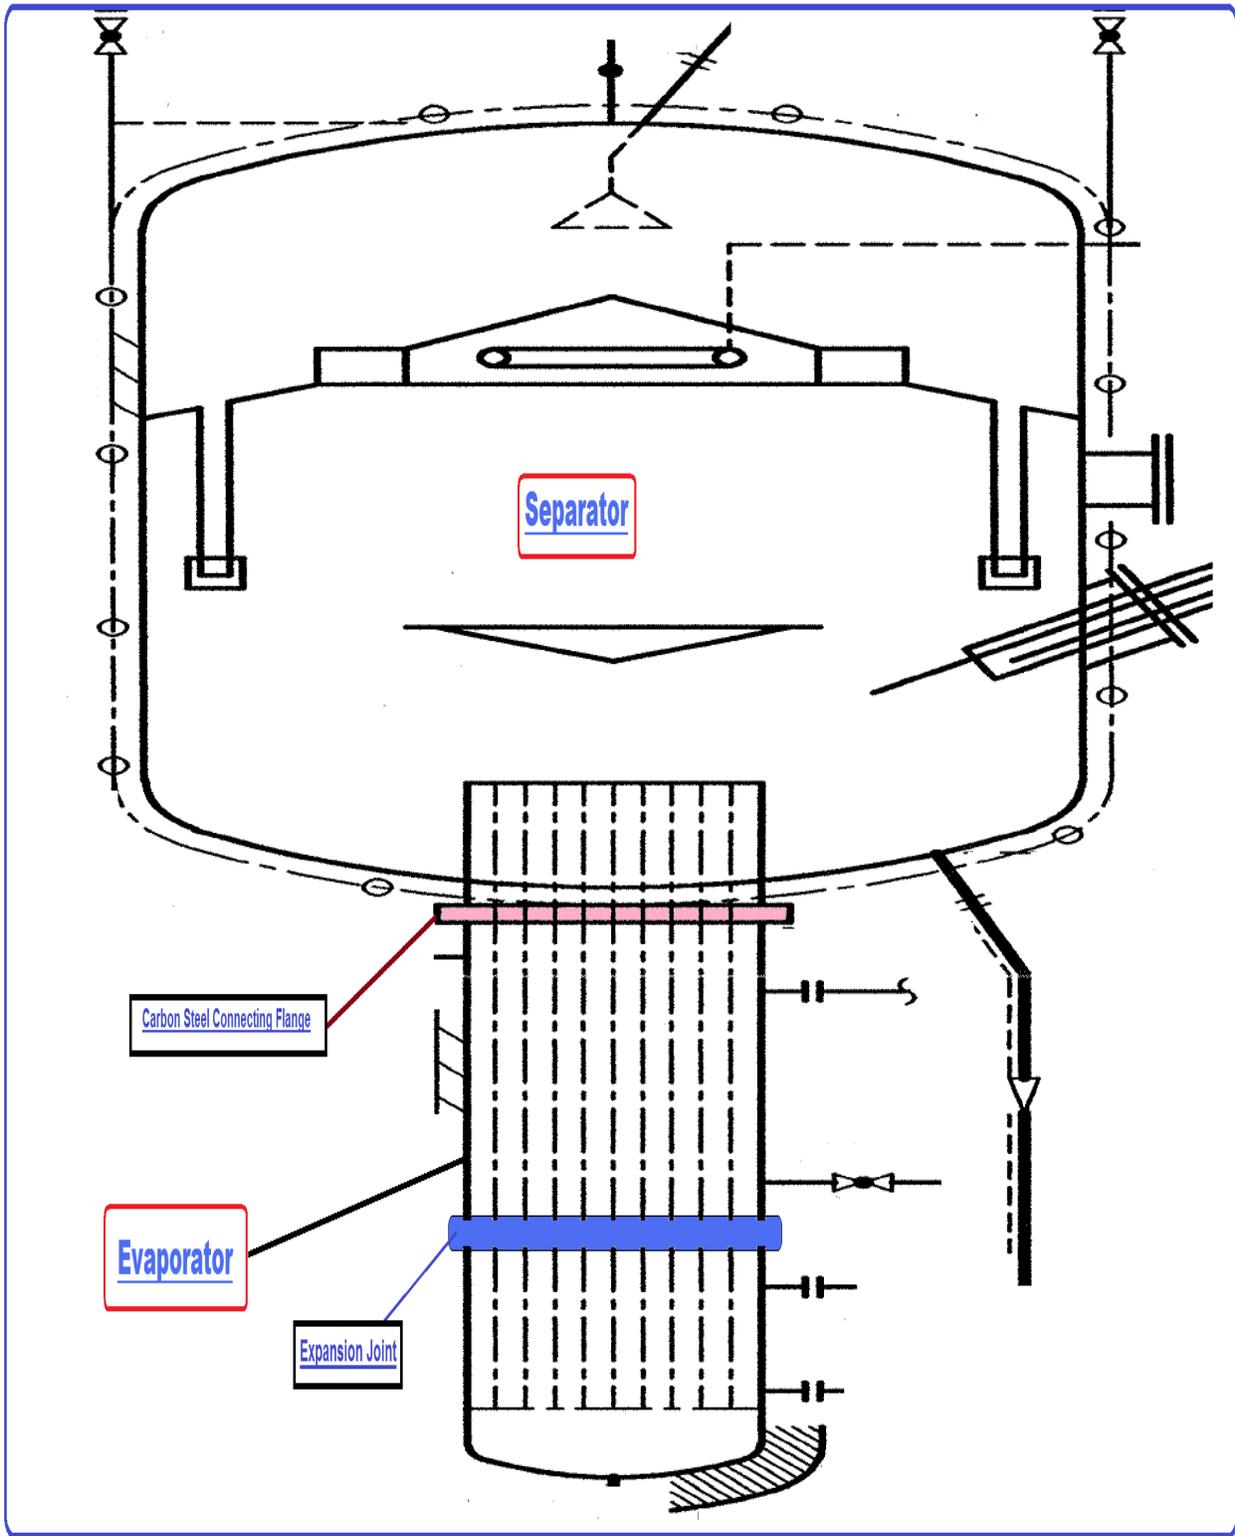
Schematic illustration for Separator-Evaporator Arrangement
